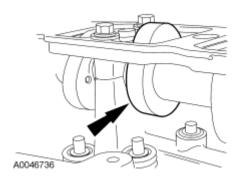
Positioning Camshaft Lobe Up Courtesy of FORD MOTOR CO.
